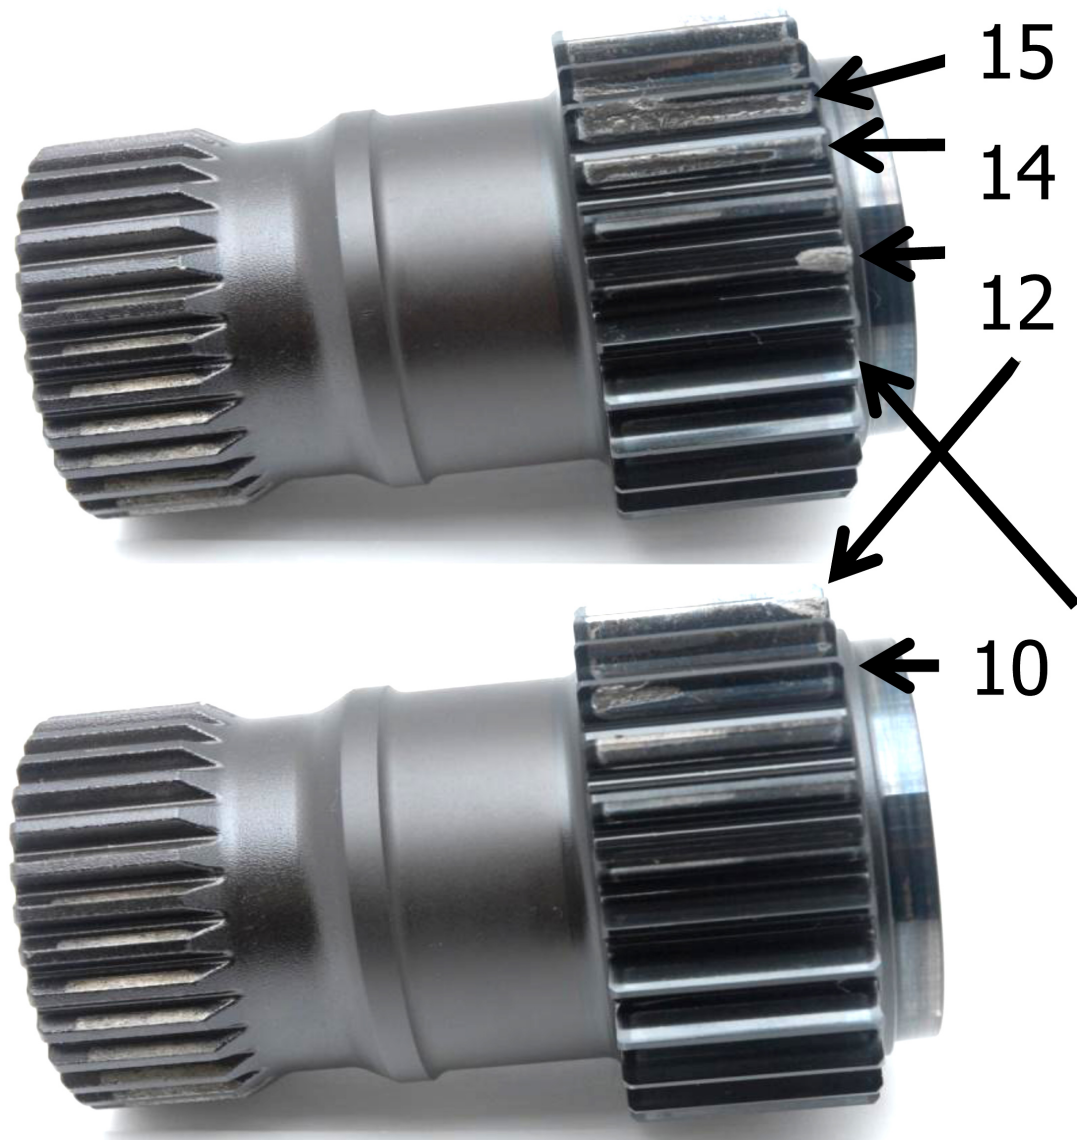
Sun Gear: Multiple Tooth Spall Case - B12-3160
